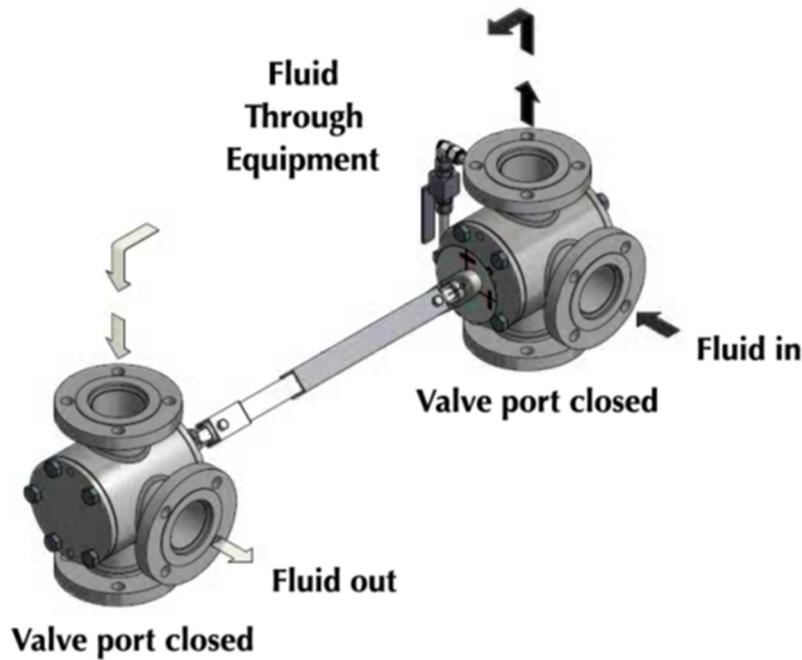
Split Three-way Transfer Valve (Image courtesy of The Hilliard Corporation)
